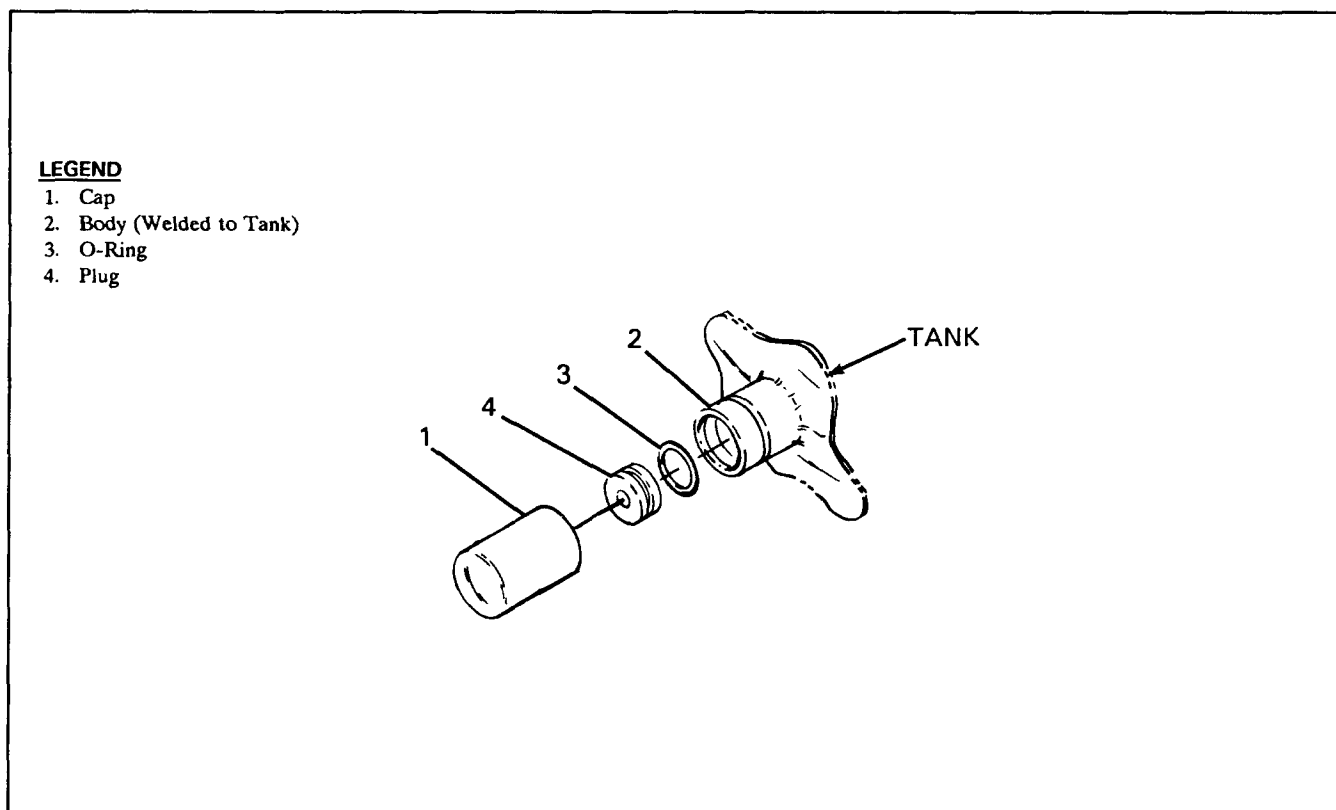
Seal-off (Vacuum Pump-down) Valve Assembly
